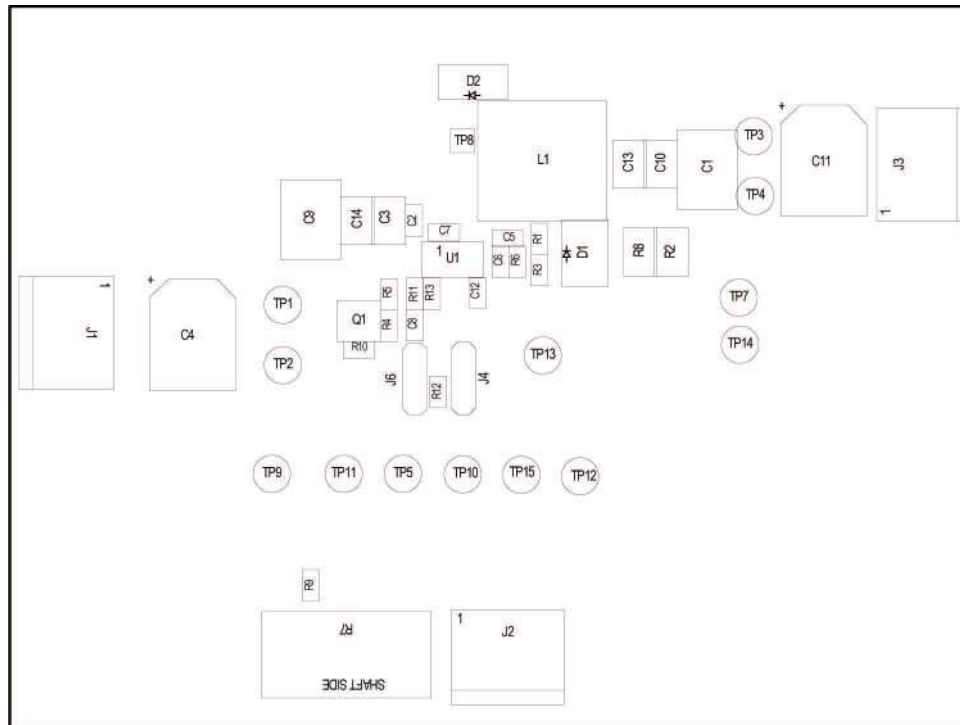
TPS92510EVM-011 Top Layer Assembly Drawing
